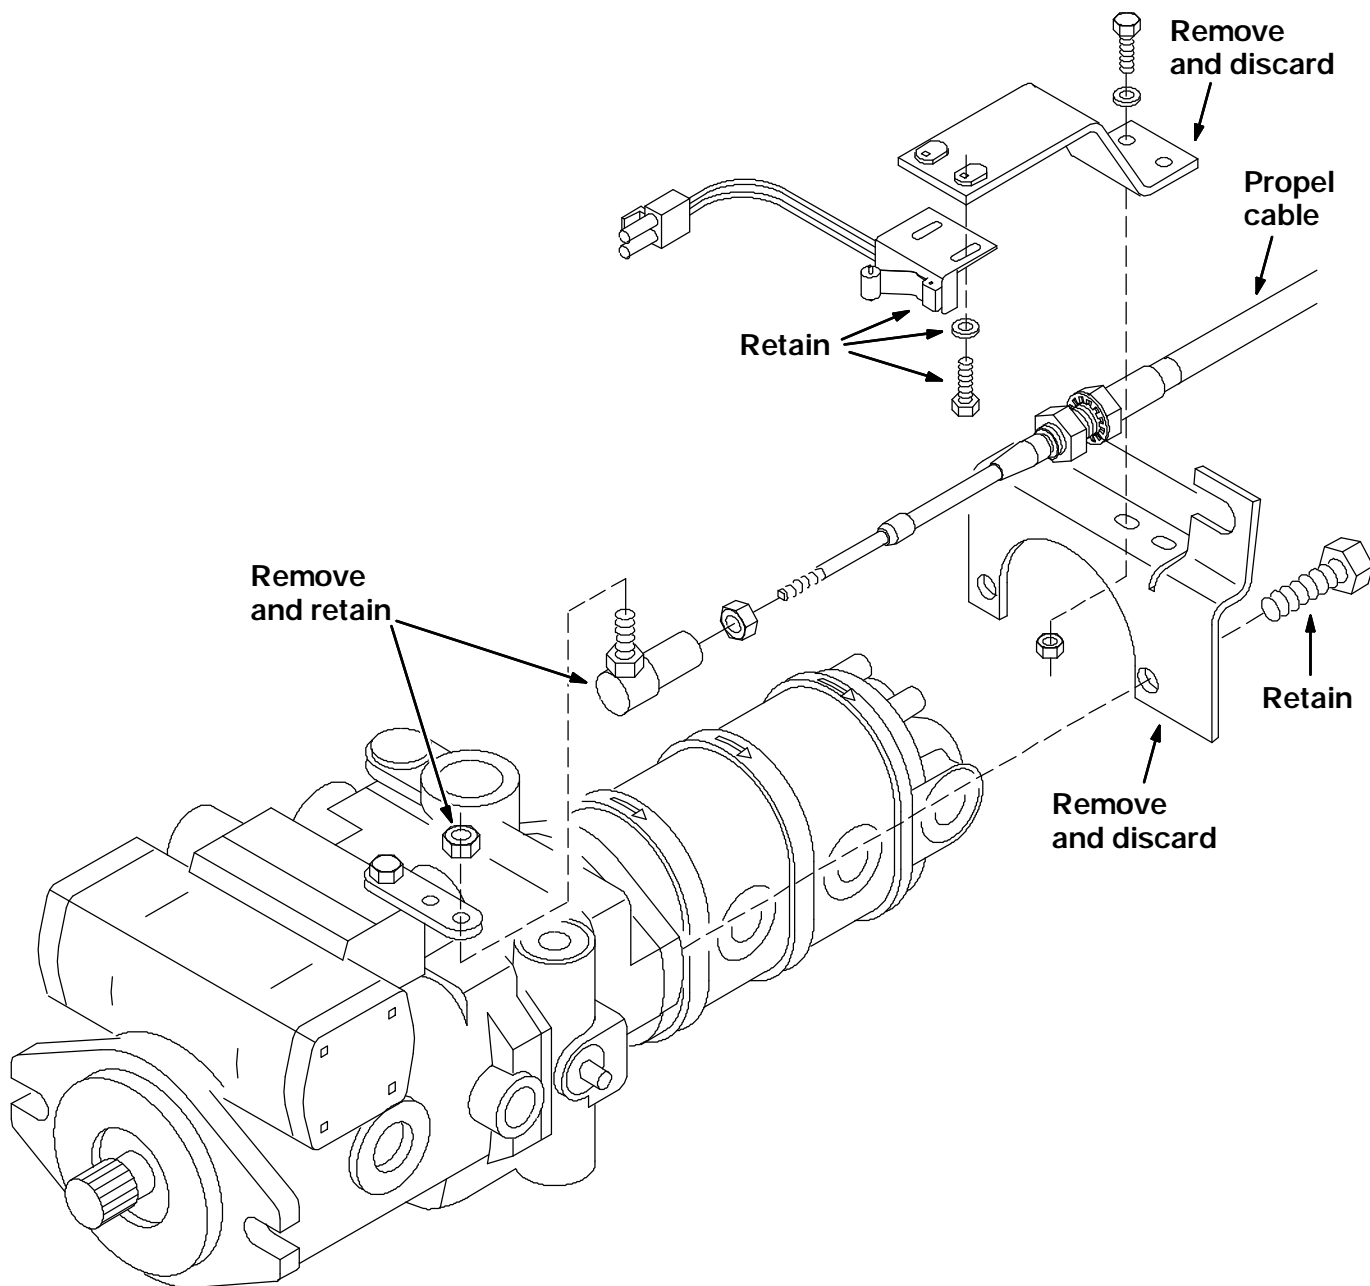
Existing Propel Cable Mount Bracket, Back-up Alarm Switch And Mount Bracket
